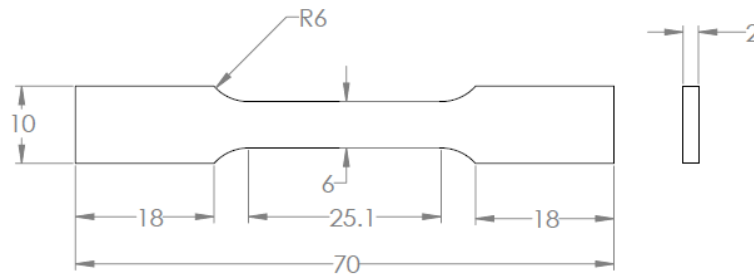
Schematic for modified subsize ASTM E8 flat dog bone style tensile specimens. Dimensions are in millimeters.
